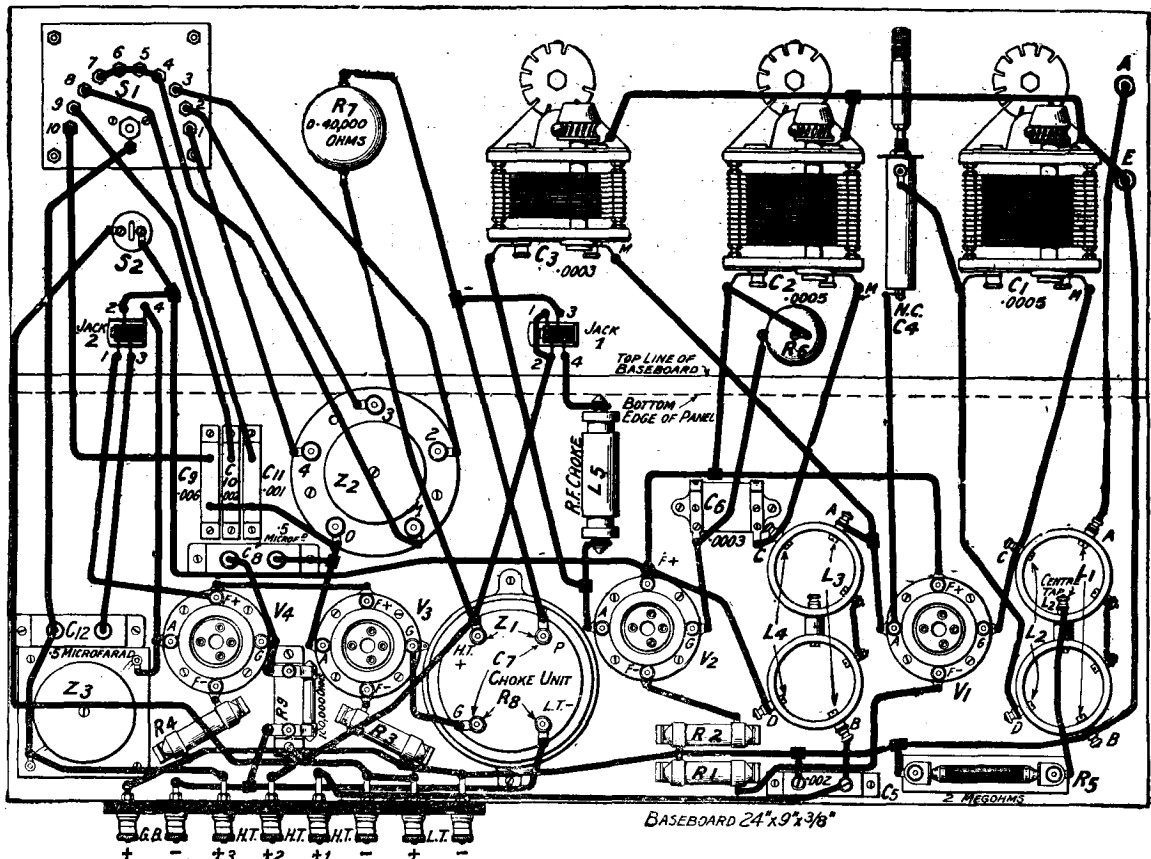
The practical wiring diagram. Special care is required when wiring the tone-control components. Blueprint No. 176b may be obtained free.
